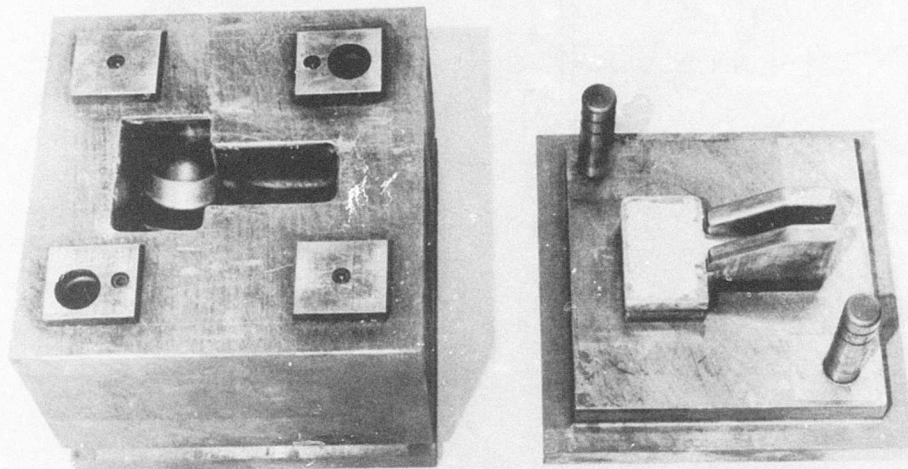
Matched-Die Steel Tooling for Quadrant Crank.
